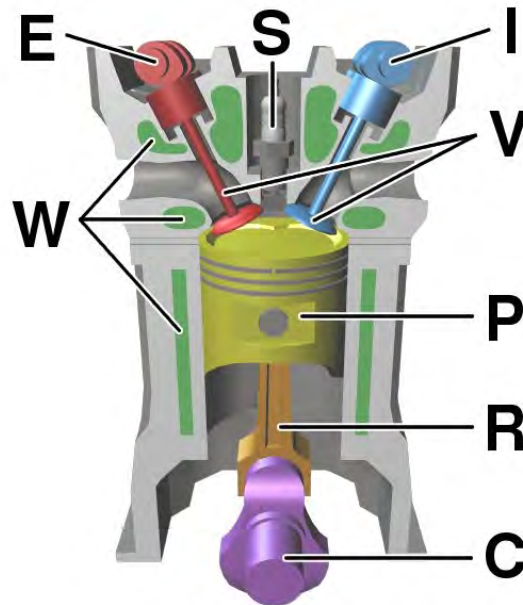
Parts of a reciprocating engine. [1], CC BY-SA 3.0
